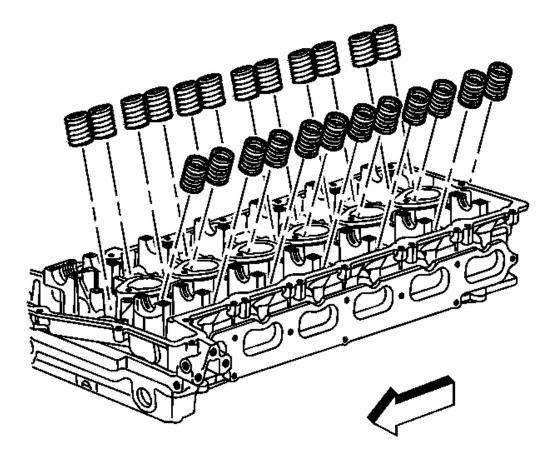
View Of Valve Springs & Retainer Courtesy of GENERAL MOTORS CORP.
